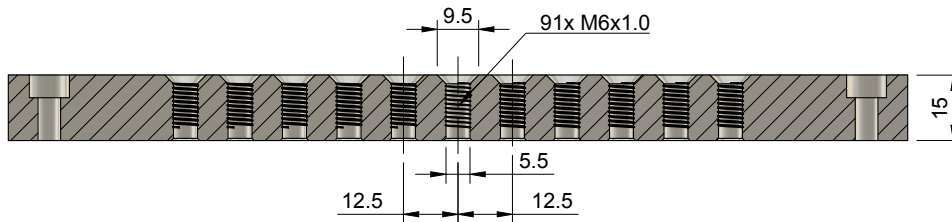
Cross-section of the plenum lid after CNC machining and post-processing.
